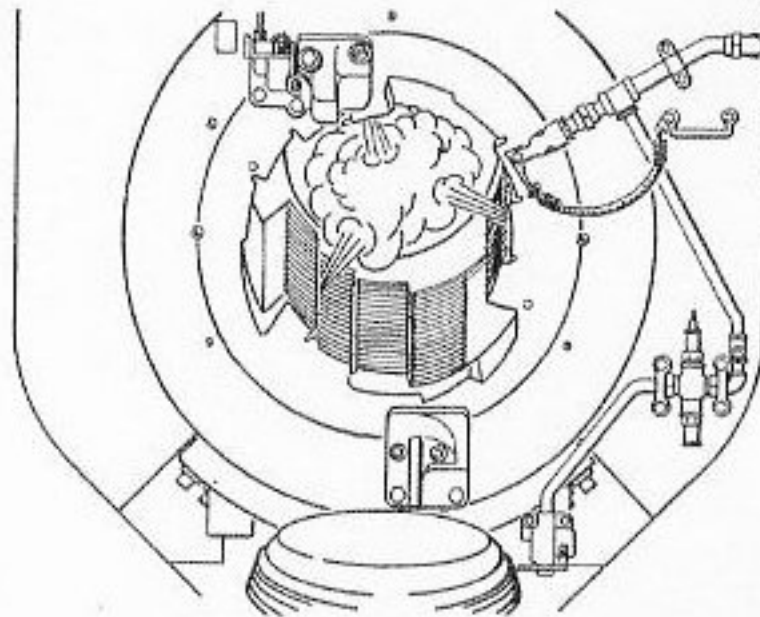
J. 16-inch Gun Assemblies. Gas Ejector Action. Breech Open.
